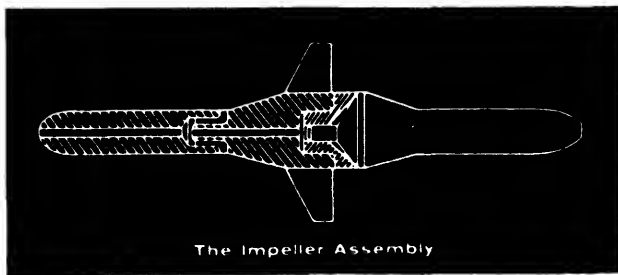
The impeller assembly of the Meterflow type of inferential flowmeter
